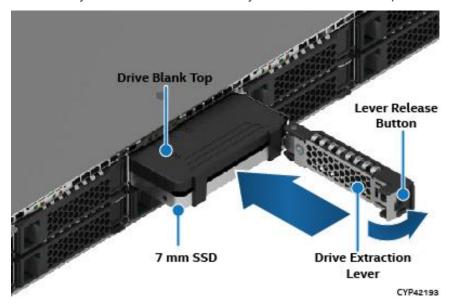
7 mm Drive Installation into 2.5" Drive Bay
